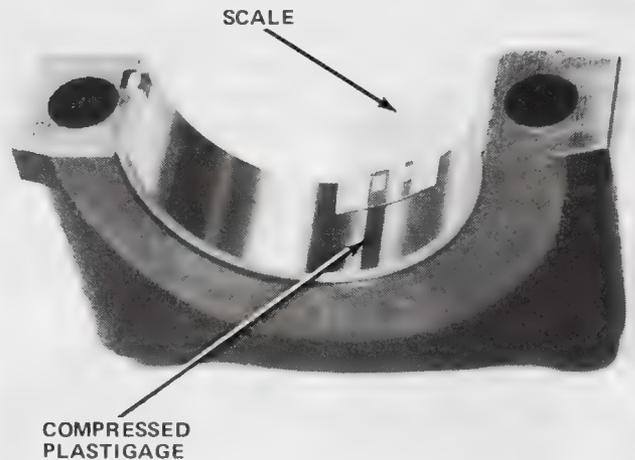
B-119 Checking Main Bearing Clearance with Plastigage
